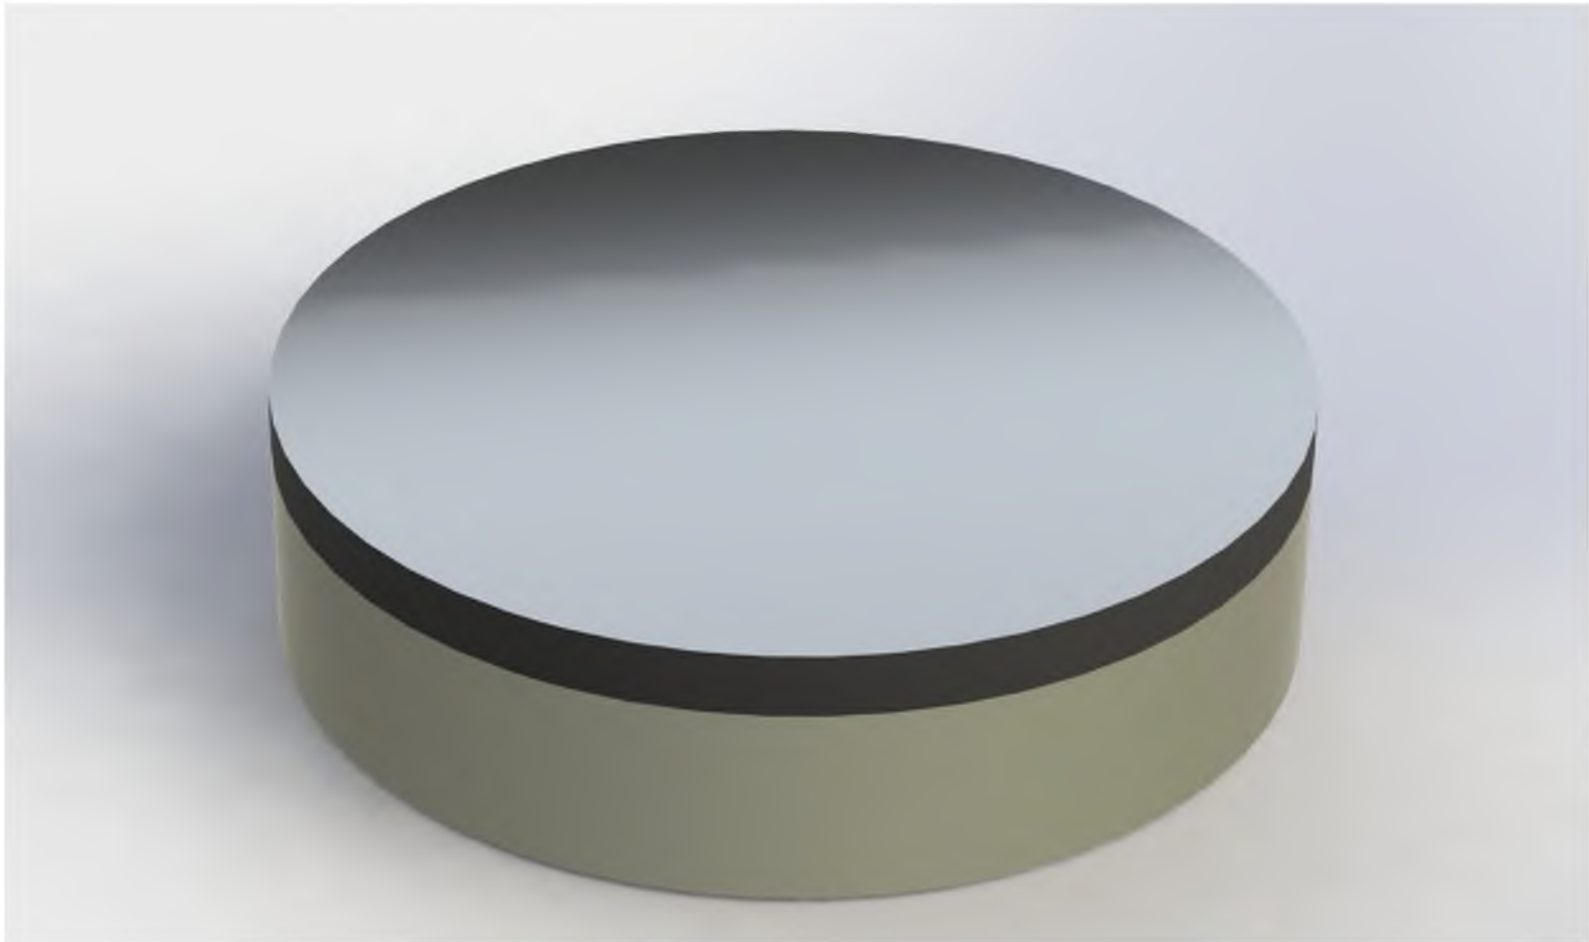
A simple shear cutter consists of a layer of PCD sintered onto a WC-Co substrate. Shear cutters are an important drill bit insert in the petroleum drilling industry.
